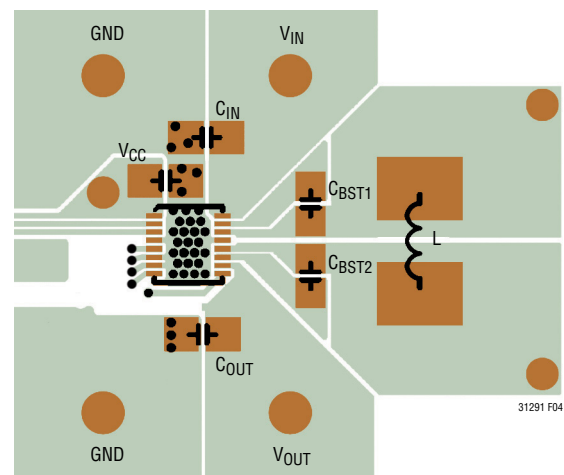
Typical 2-Layer PC Board Layout (MSE Package)
